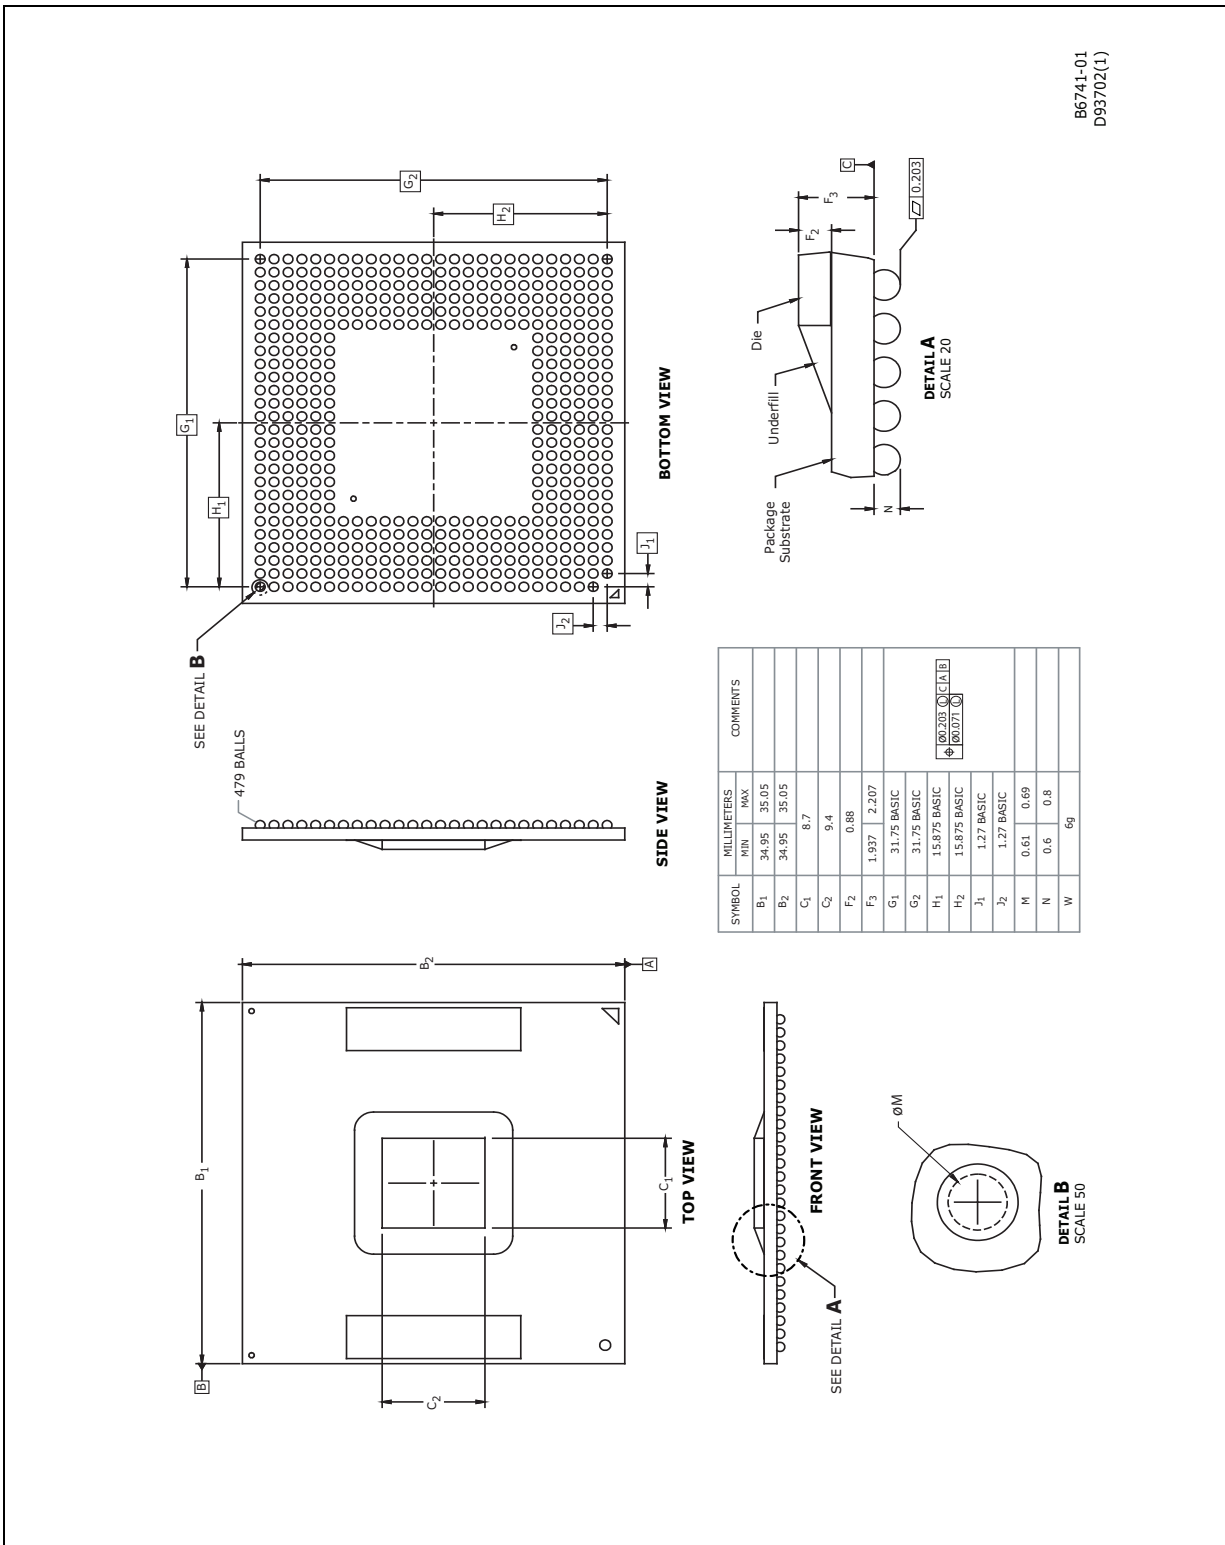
3-MB Die Micro-FCBGA Processor Package Drawing (Sheet 1 of 2)
